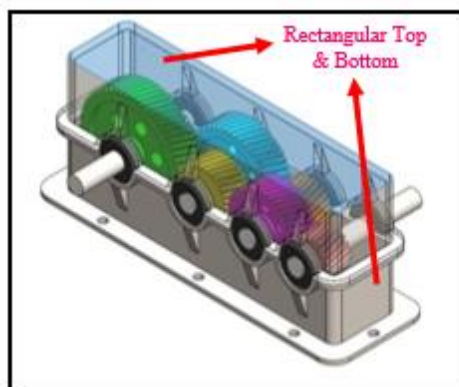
Existing 3D CAD model for three stage helical gearbox with rib and cover assembly cross sectional view
